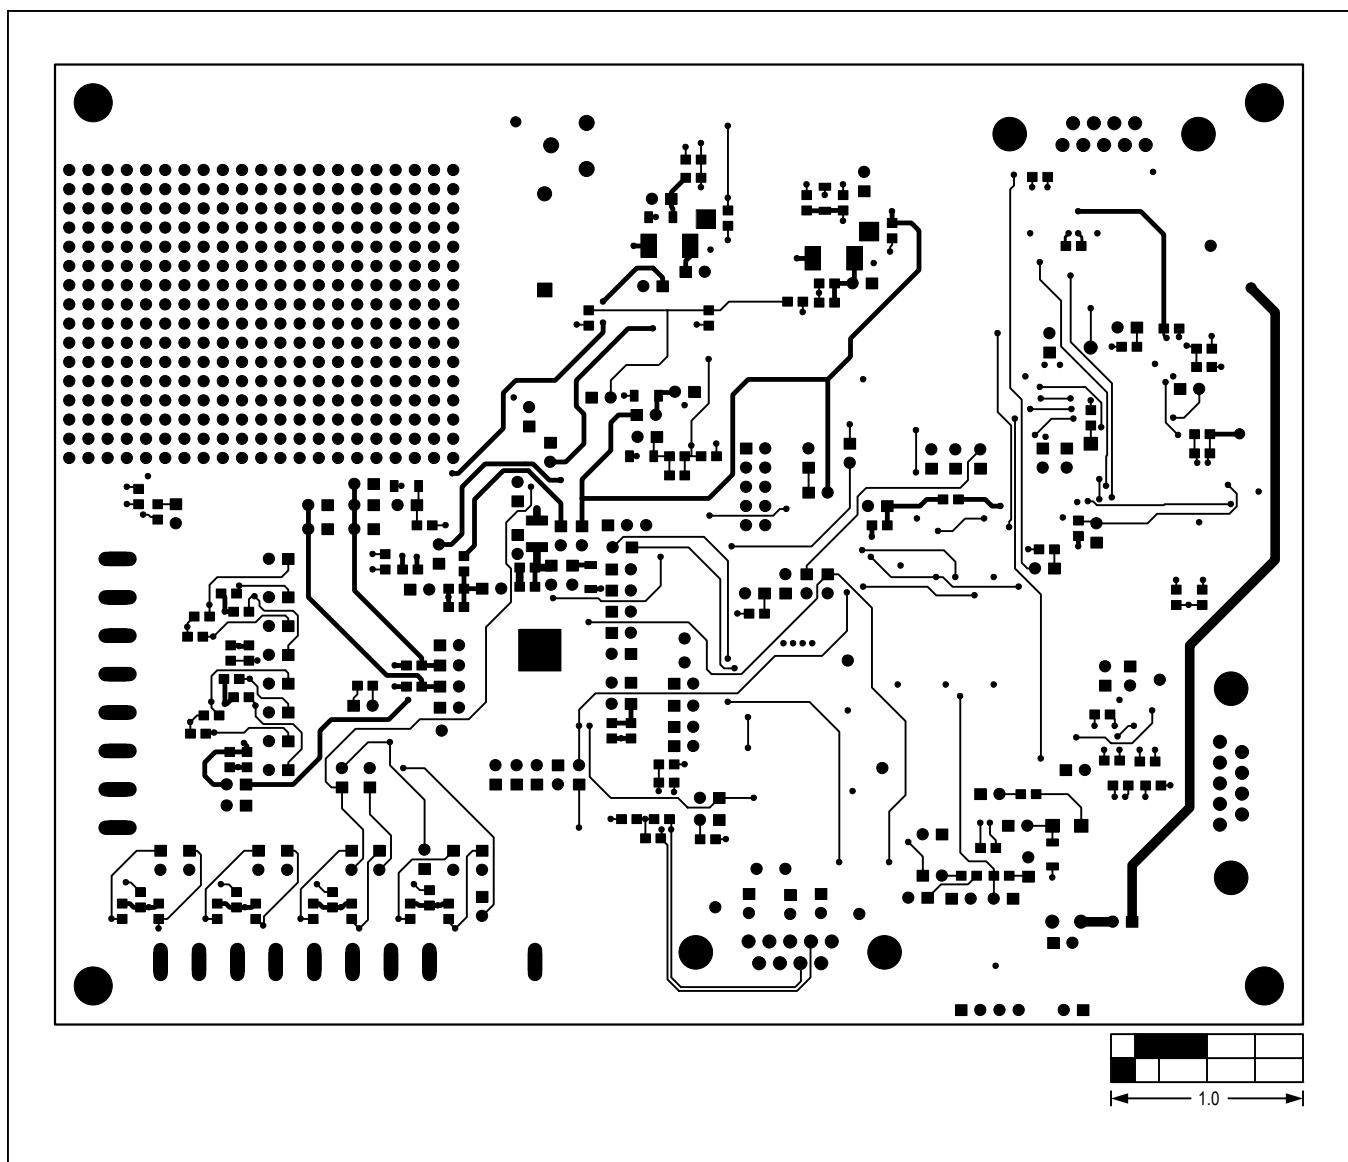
MAXQ7665 EV Kit PCB—Solder Side
